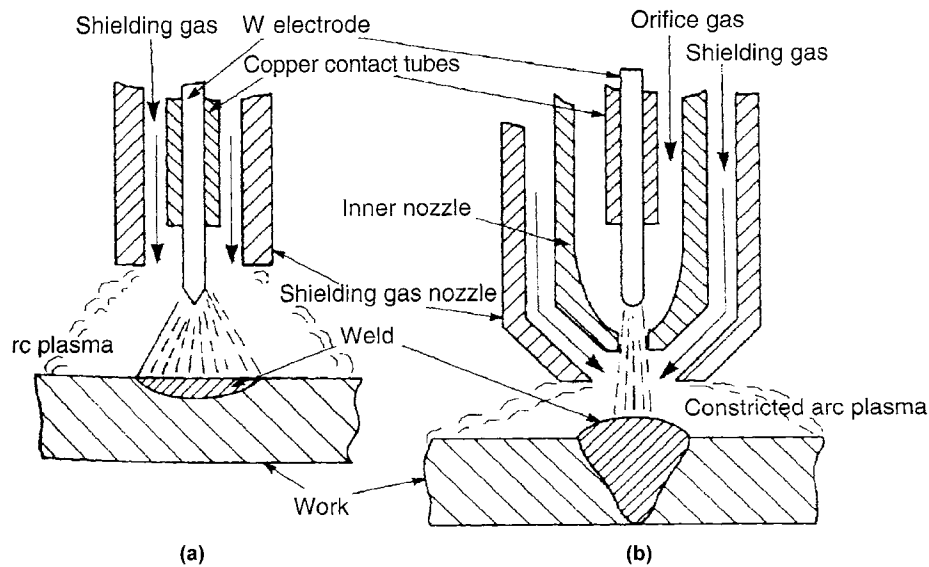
Schematic illustration comparing (a) gas tungsten arc welding and (b) plasma arc welding processes. Source: Ref 2
